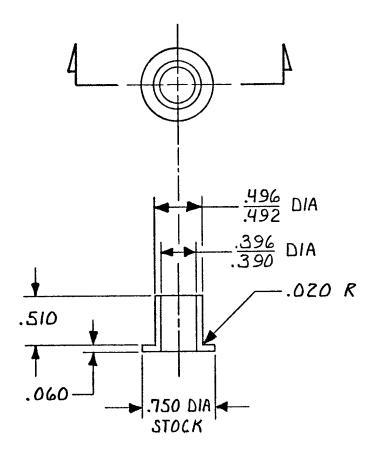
Machining of the Flanged Barrel Section of the Transmission Housing.
